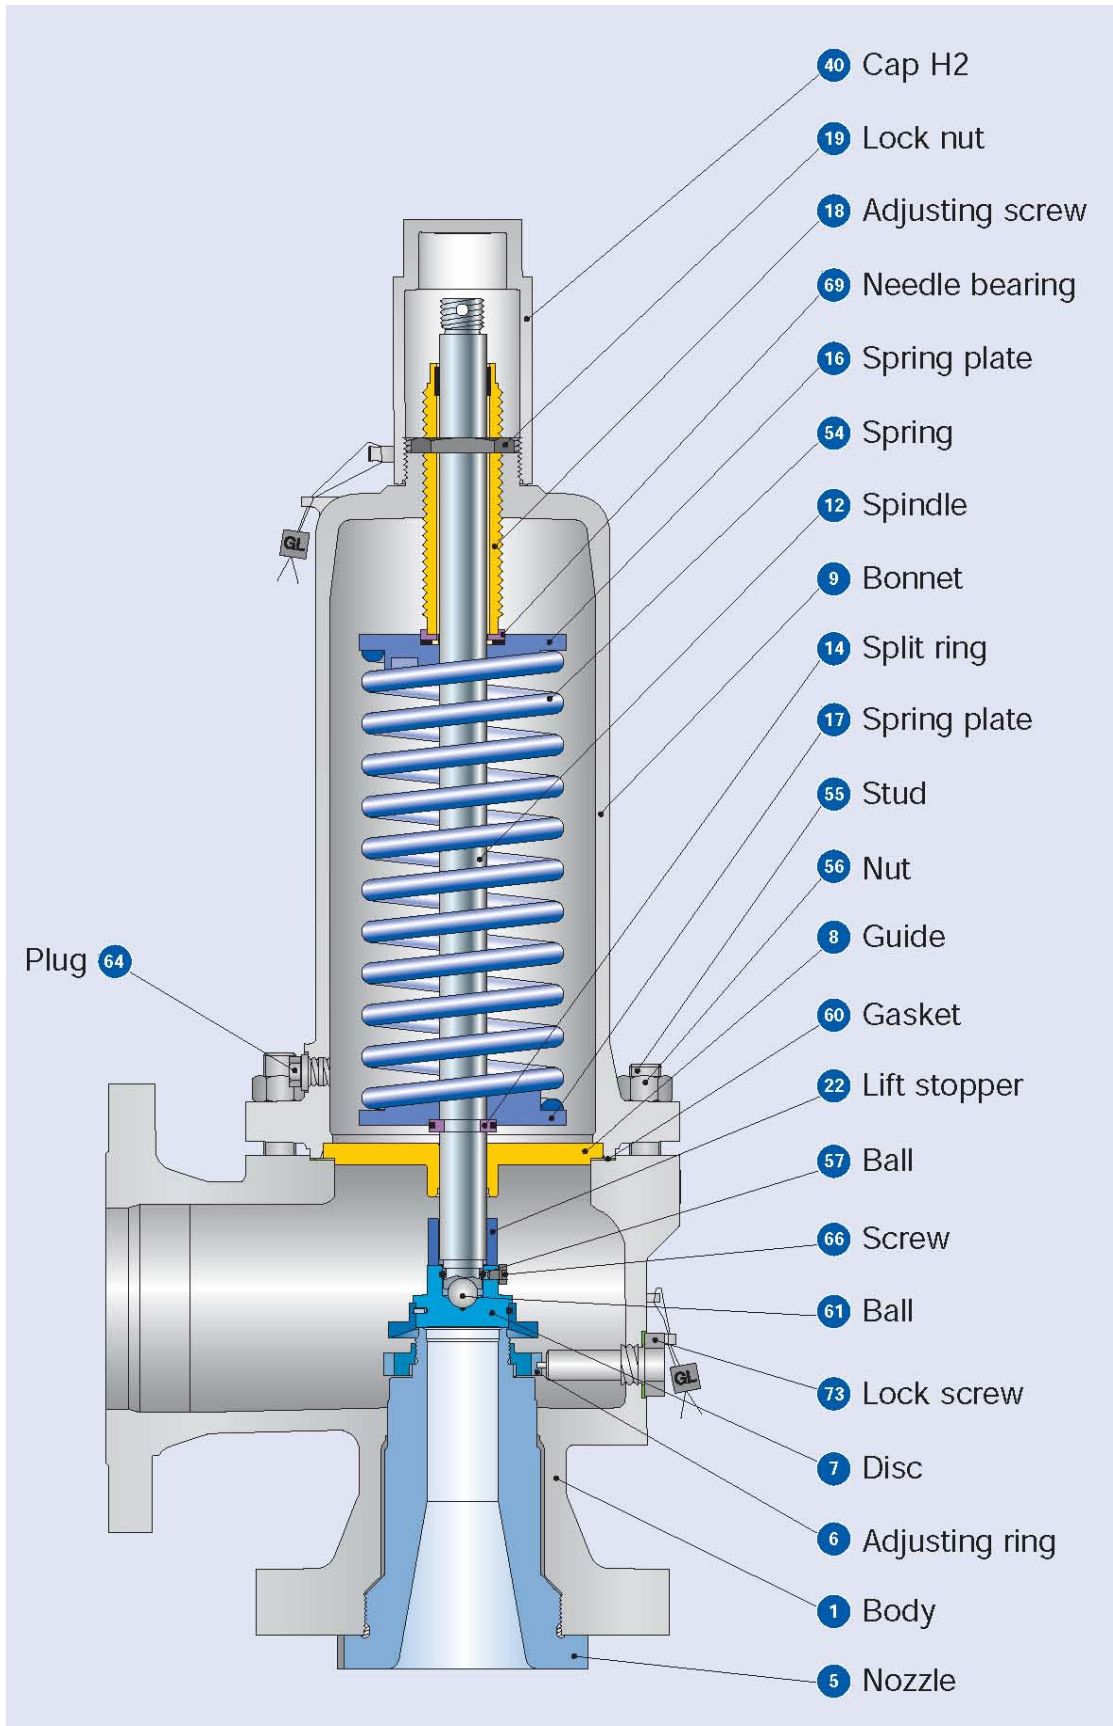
Parts of a Conventional Spring Loaded Safety Valve – Flanged
